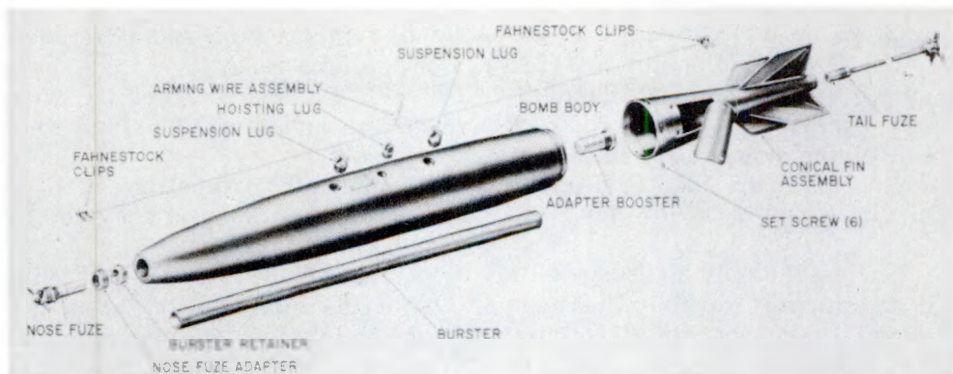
500-Pound Chemical (Gas) Bomb Mk 94 Mod 0, exploded view.
